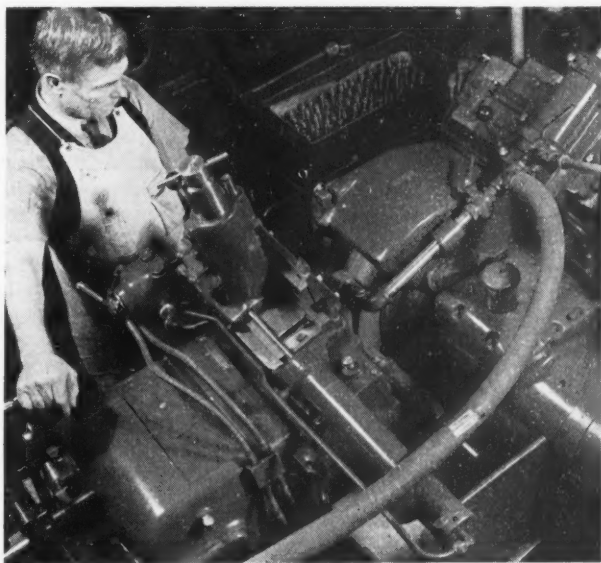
With this No. 2 Centerless Grinding Machine, two diameters of knuckle pins for airplane engines are ground to a mirror finish.
